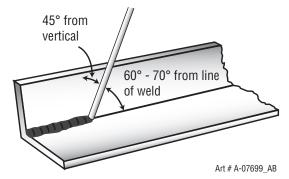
Electrode Position for HV Fillet Weld
